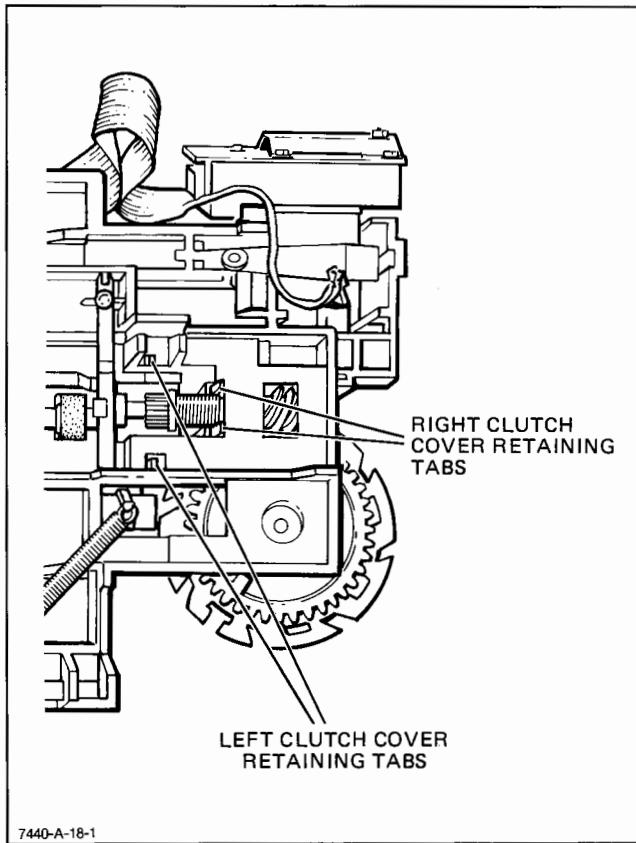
Left Pinch Wheel Arm Removal, Detail D
